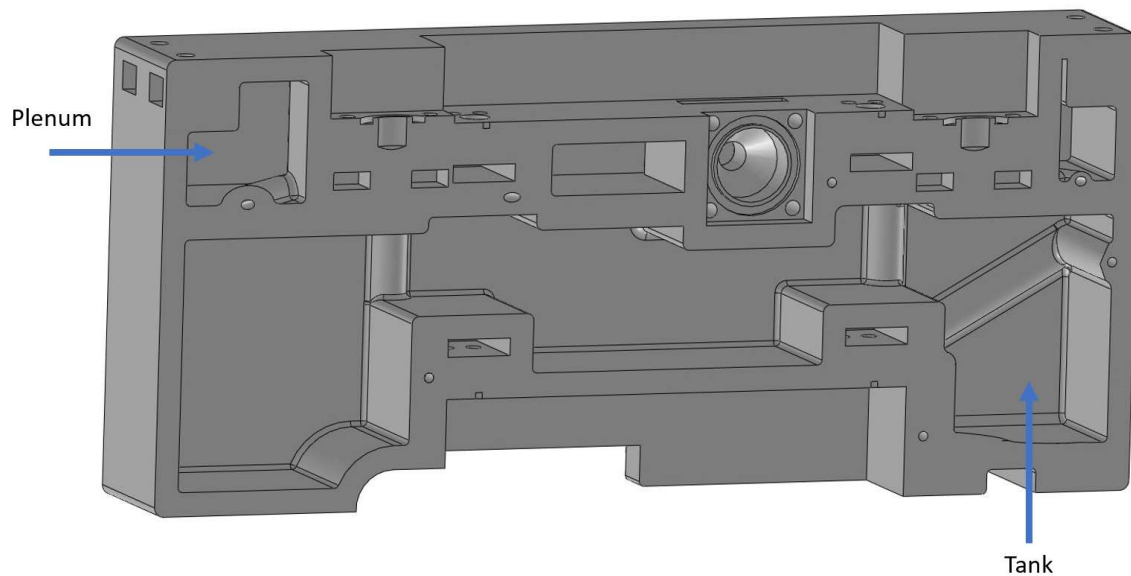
Layout of Tank and Plenum Internal to the Printed Structure
